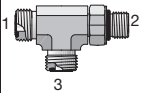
UPTC Seal-Lok is adaptable to a UPTC hydraulic or thermoplastic hose assembly. To be used with ET, EN, or EU hose ends.
